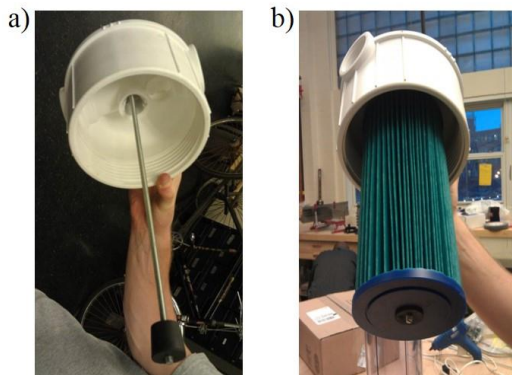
a) Internal threaded rod and plug assembly for supporting the cartridge filter b) newly supported cartridge filter with extended housing
